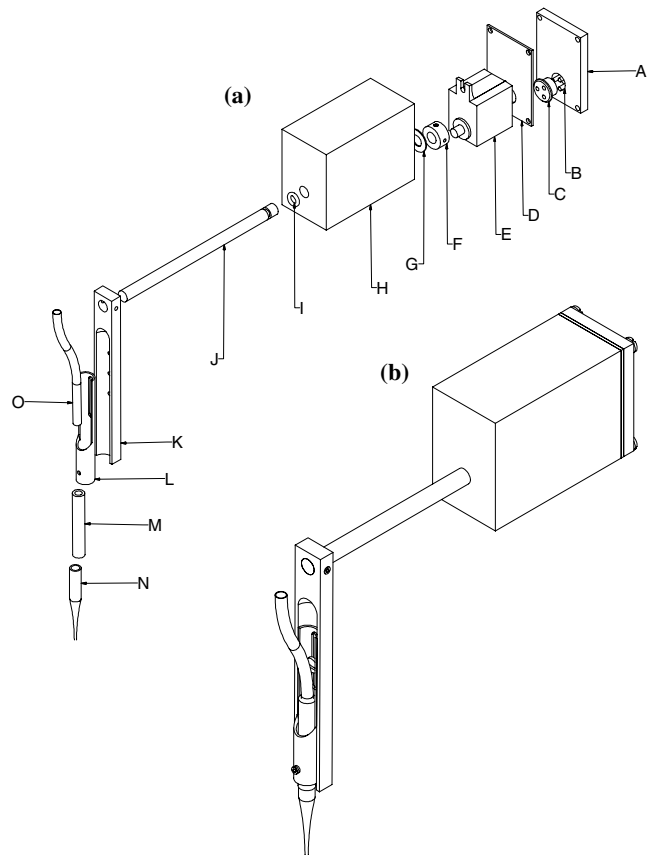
Diagram of the vacuum-isolated servo-motor assembly used to move the source. (a) Exploded view and (b) assembled view. Legend in (a): A: top flange of vacuum box; B: 3-pin electrical feedthroughs (0–80 screws) epoxied into Delran™ insulation (C) in turn epoxied into A; D: 1/32 inch Viton gasket; E: servo-motor with retaining screw slot; F: mechanical coupler from servo-motor shaft to main drive shaft J; G: Teflon™ washer to reduce friction between F and vacuum box H; I: O-ring forming seal between H and J; K and L: supports for needle mounting; M: cylinder for grounding needle and allowing Teflon ‘spaghetti’ tube O to mate with outside of N; N: glass tube which is silver-painted outside and then outside-sooted. Teflon tube O conducts gas from outside (see Paolini and Khakoo 1998). Not shown: a Teflon bearing (1/4 inch ring in an L-support attached to H, to precisely support shaft J at about 3/4 inch from the end of H). The servo-motor defines ϕ (see figure 3).
